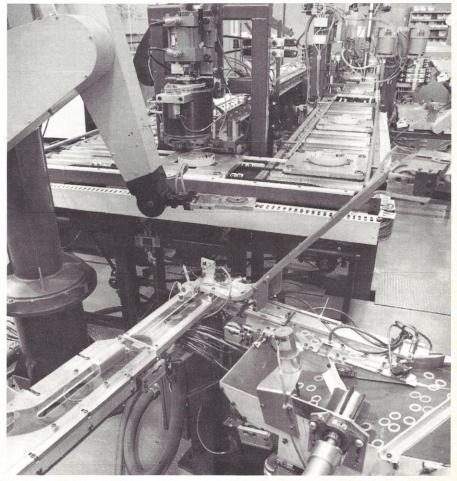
APAS station 105. This is the final assembly station. Again, the parts presentation techniques and gripper design provided important engineering lessons.
